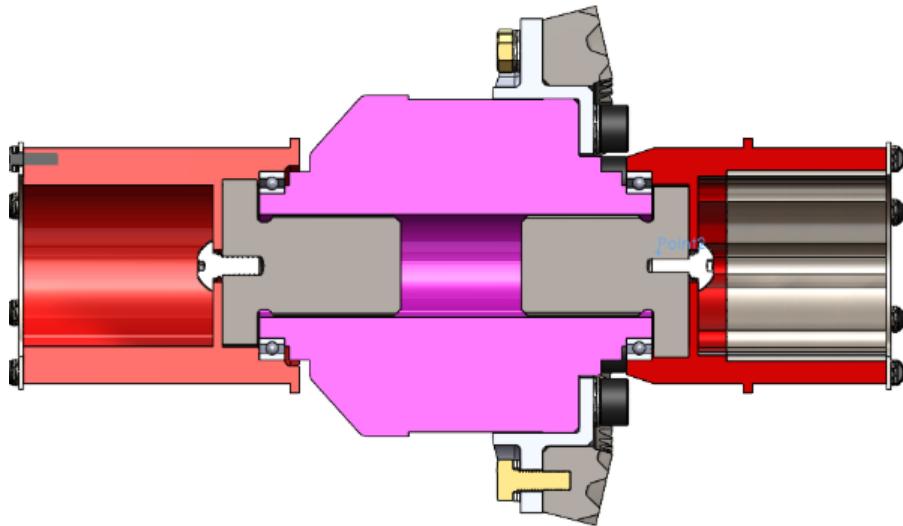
The Wavetrac integrated into the TG21 front box with plunging cups and ring gear carrier attached.
